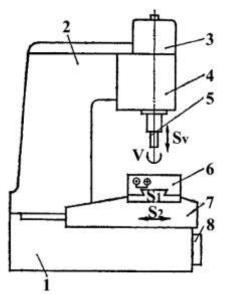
Fine boring machine: 1-bed; 2-frame; 3-drive; 4-boring head; 5-spindle; 6-table; 7-carriage; 8-drive
